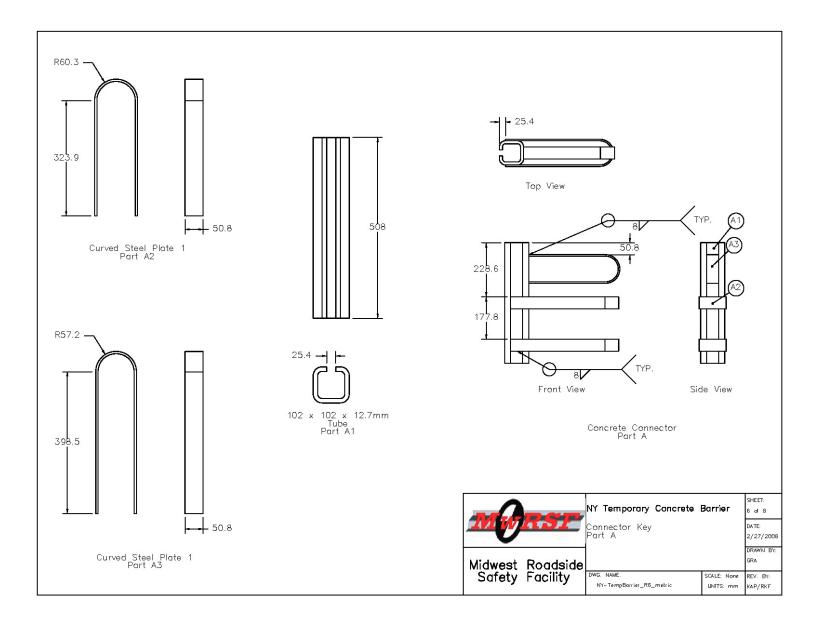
Temporary Concrete Barrier Connector Assembly Details, Test NYTCB-2
